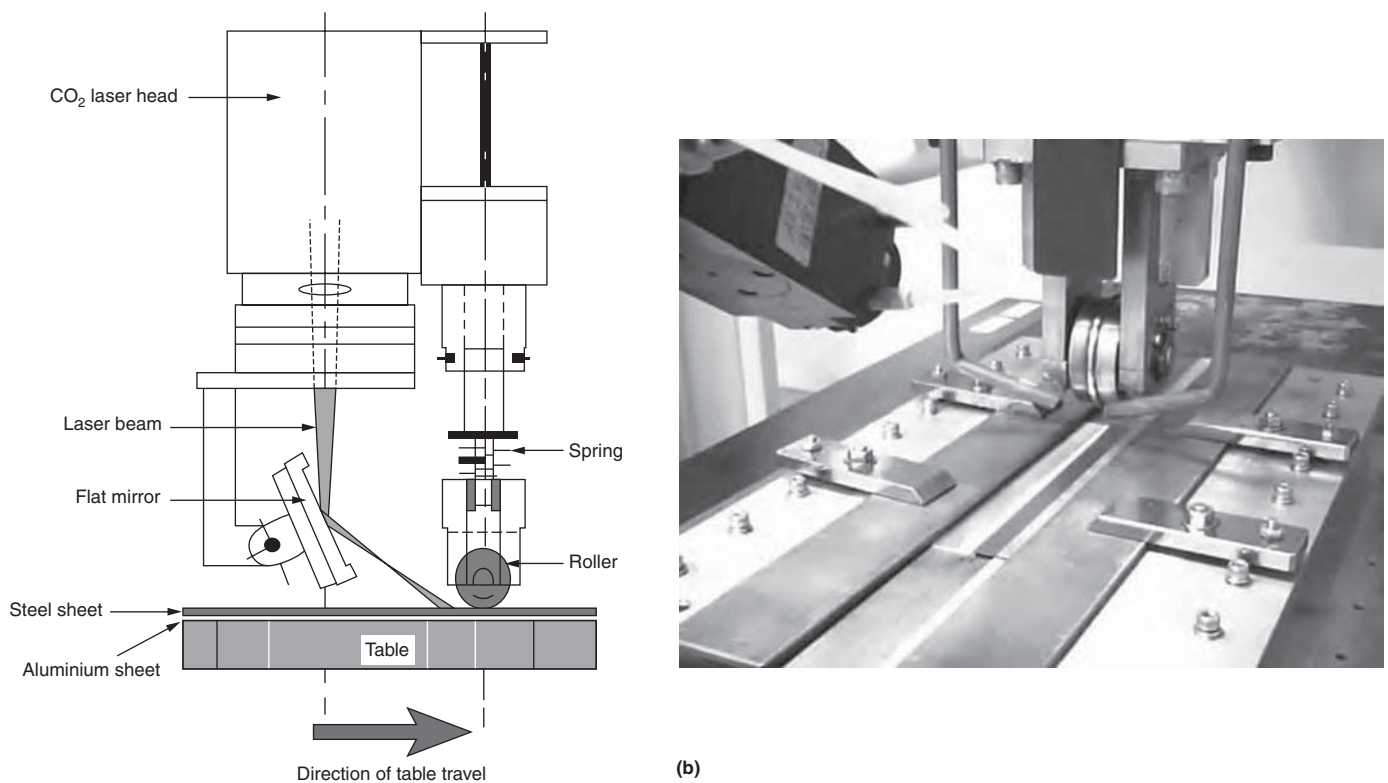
Laser roll welding. (a) Schematic of laser roll welding process with aluminum and steel sheet. (b) Using a 2 kW fiber laser
